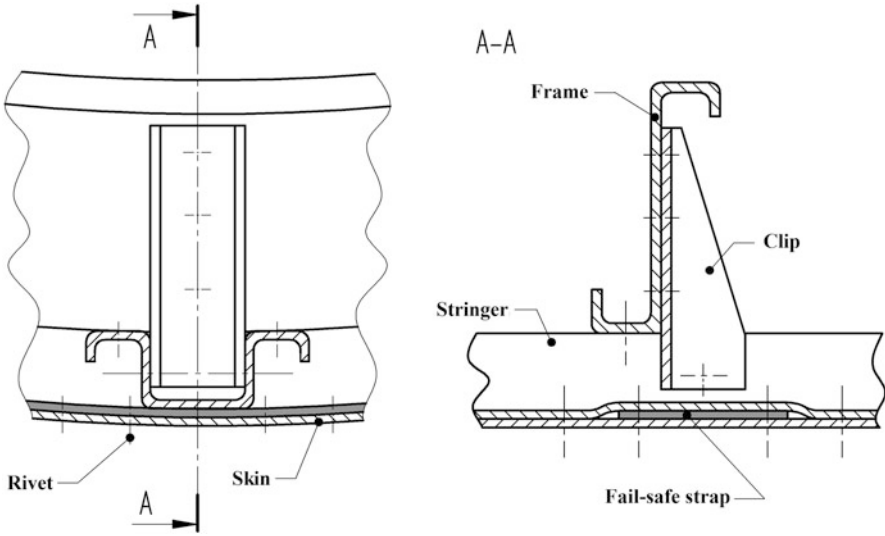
Stringer clip connections between the frame and stringer (floating frame) with a fail-safe strap
